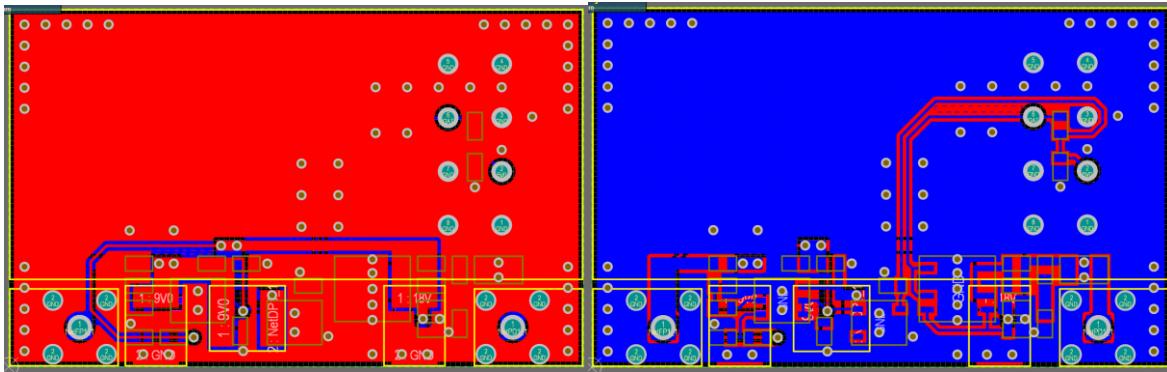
Top layer (L) and bottom layer (R) PCB layout
